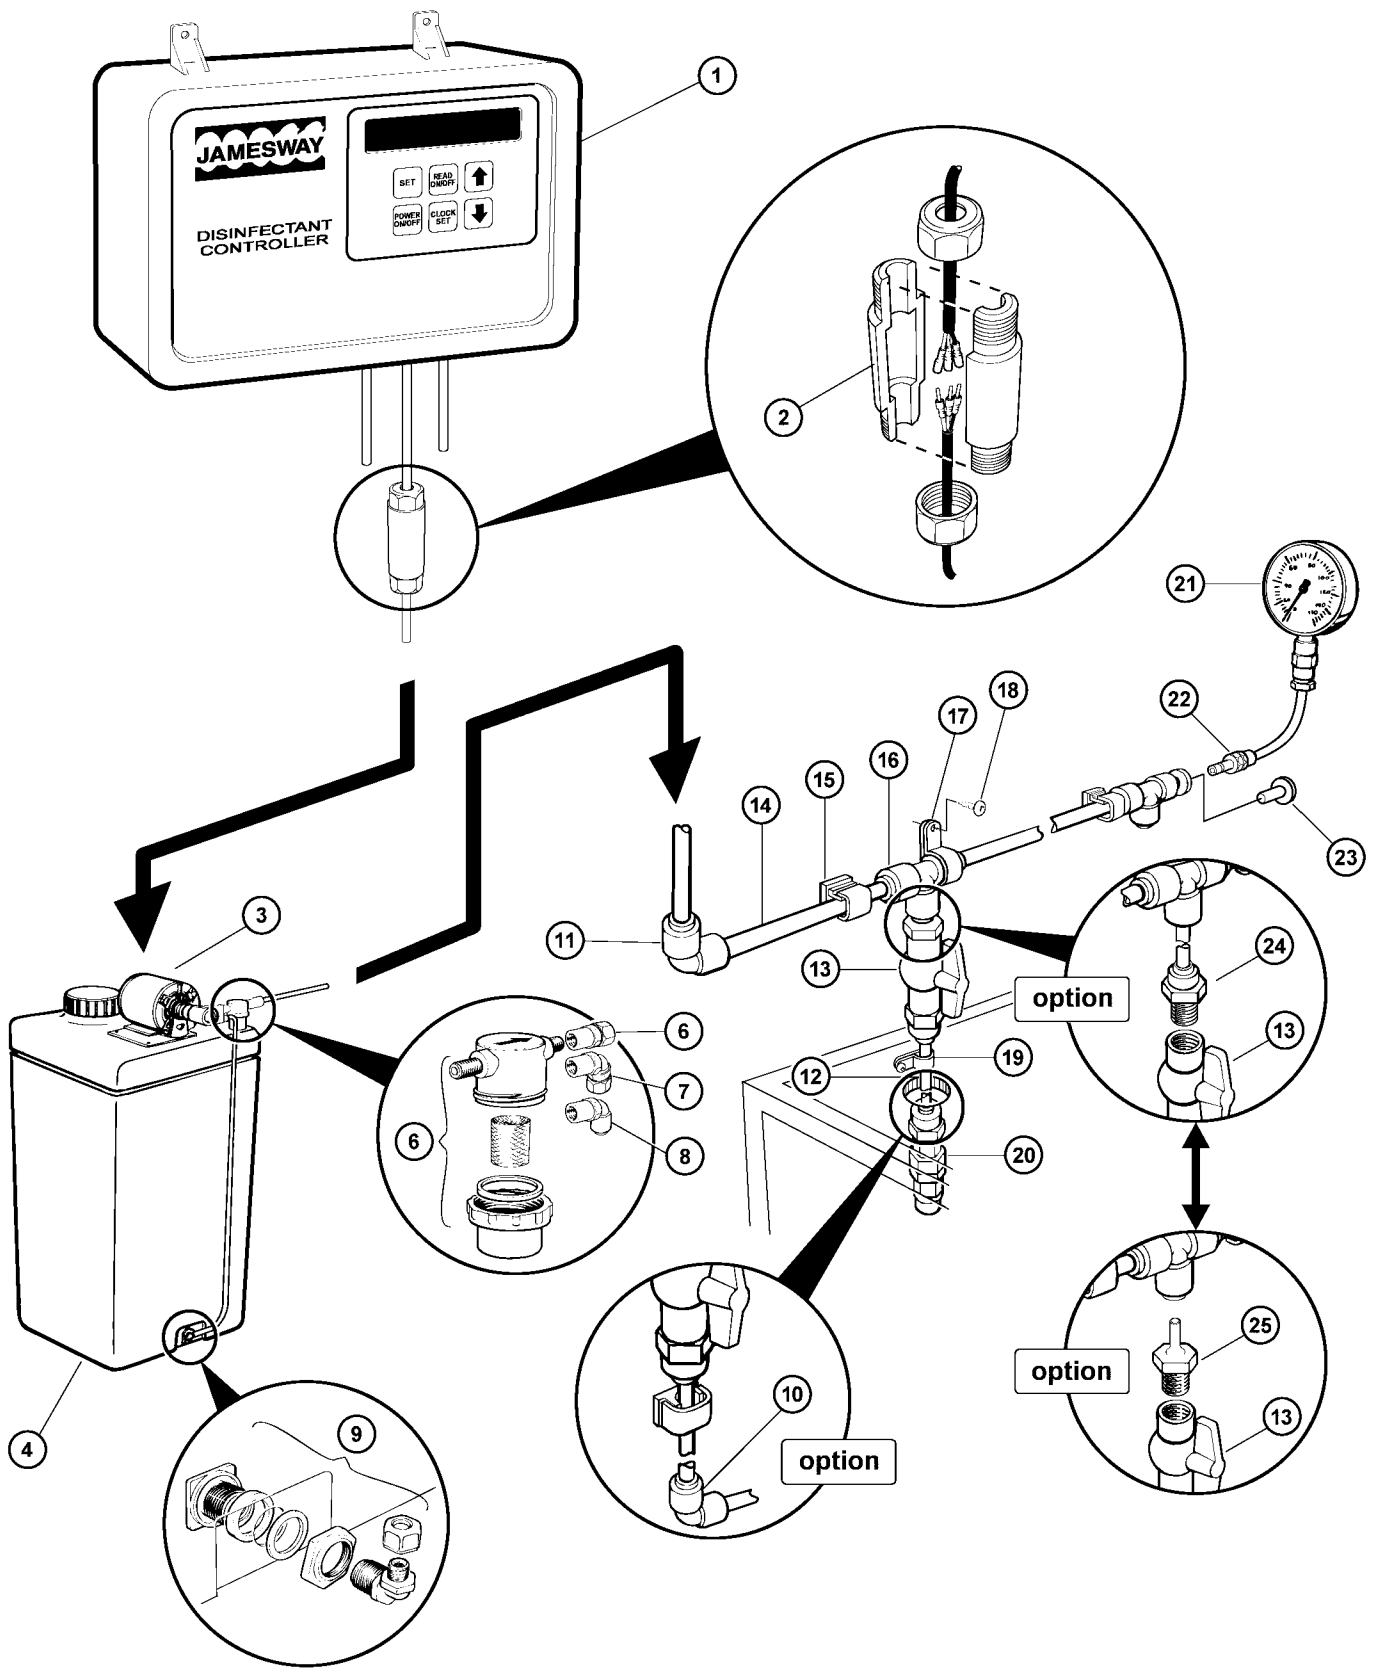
Exploded parts diagram – Hachery Disinfectant System
